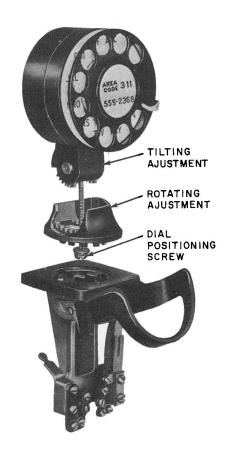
Positioning Adjustments of 43A Dial Mounting
